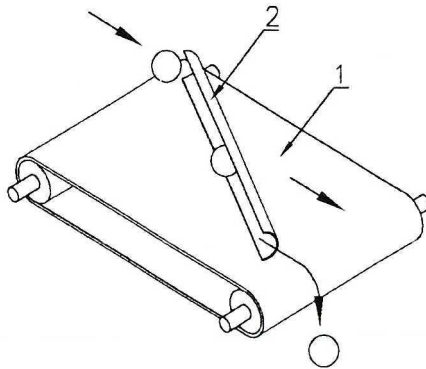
Forming pieces into spherical forms between trough and conveyor
